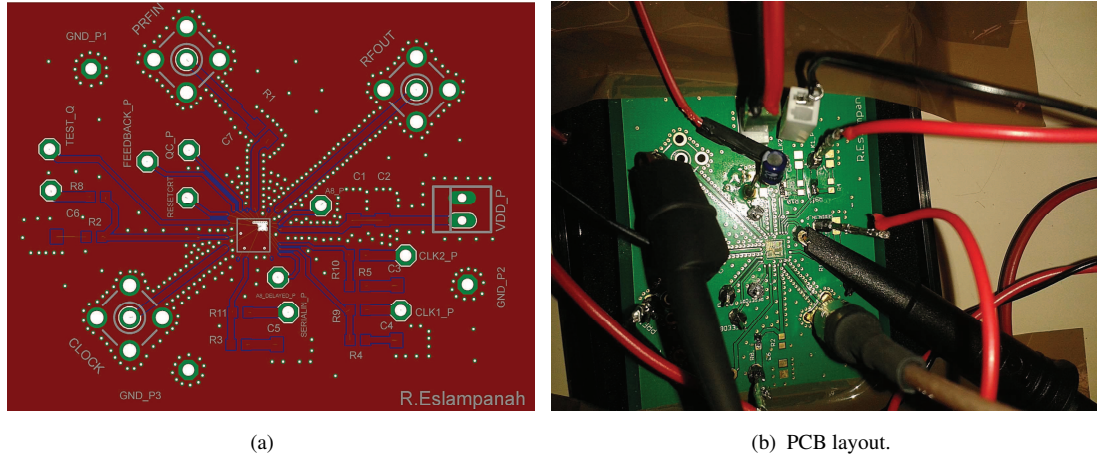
PCB with surface mount components (SMD) and the chip. (a) naked board (b) Populated board under test
